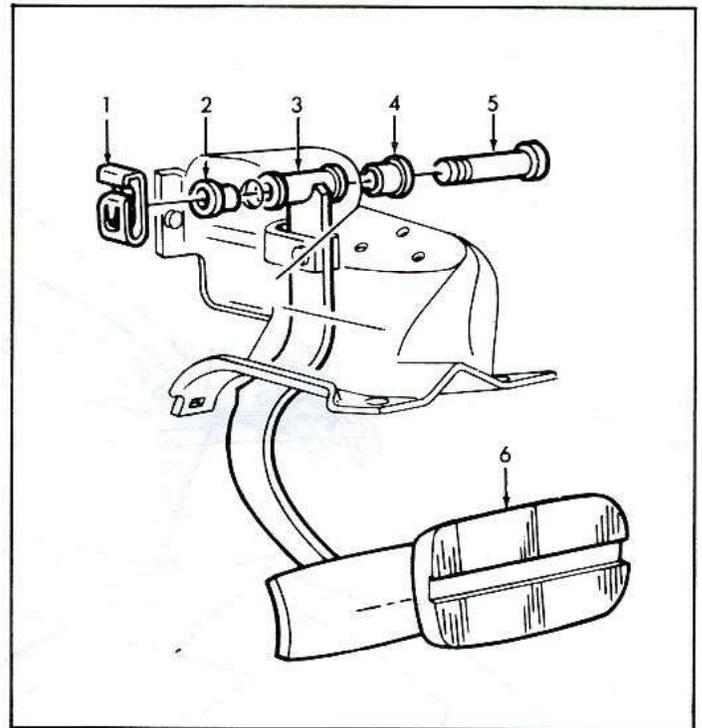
Brake Pedal and Attachments—w/Automatic Trans.
